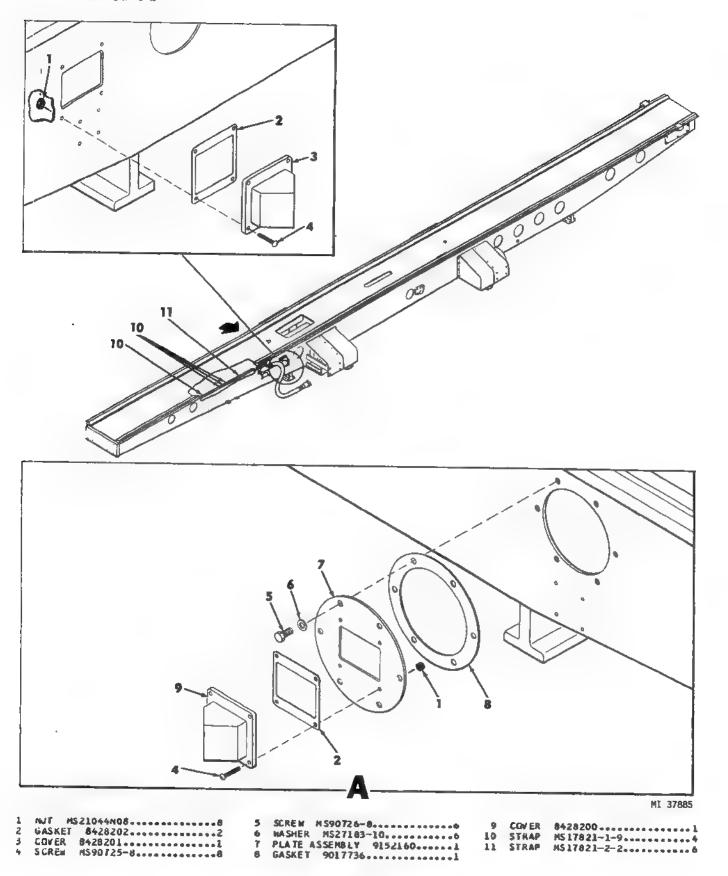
ELECTRICAL INSTALLATION, LAUNCHING RAIL /B167172/
